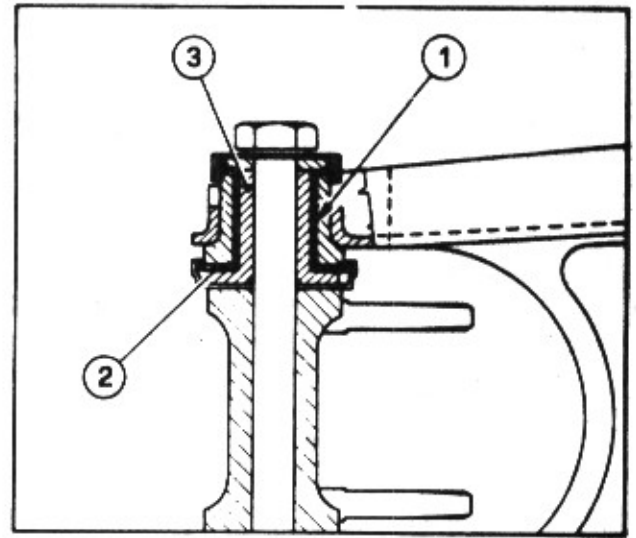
Side View of Suspension Arm-to-Chassis Attachment Bushings
